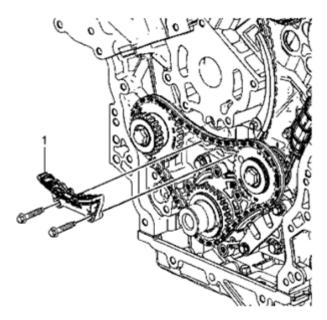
Identifying Timing Chain Guide No. 2 Courtesy of SUZUKI OF AMERICA CORP.
